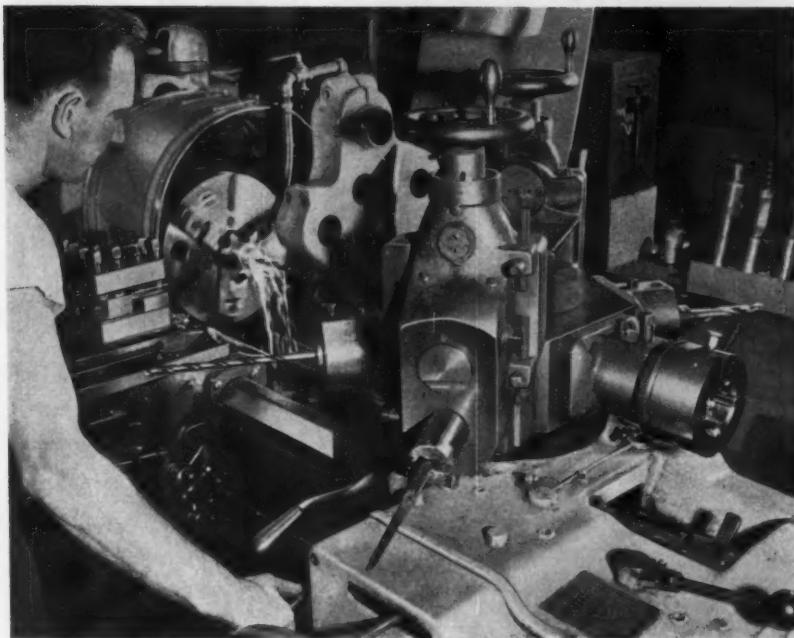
Internal contours up to 7 1/2 inches in depth are drilled in mold plungers on a No. 2-A saddle type W&S turret lathe at the tool room of the Thatcher Glass Mfg. Co.
